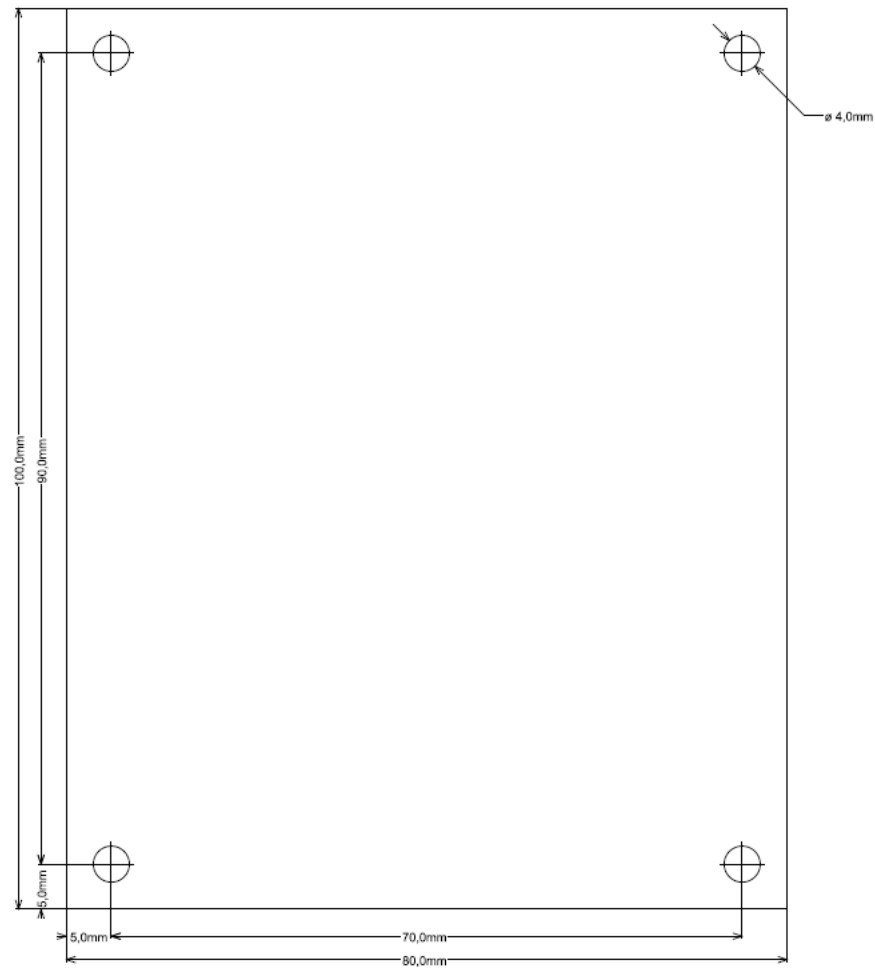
Dimensions of the Inpixon Swarm UWB V3 Dev Board
